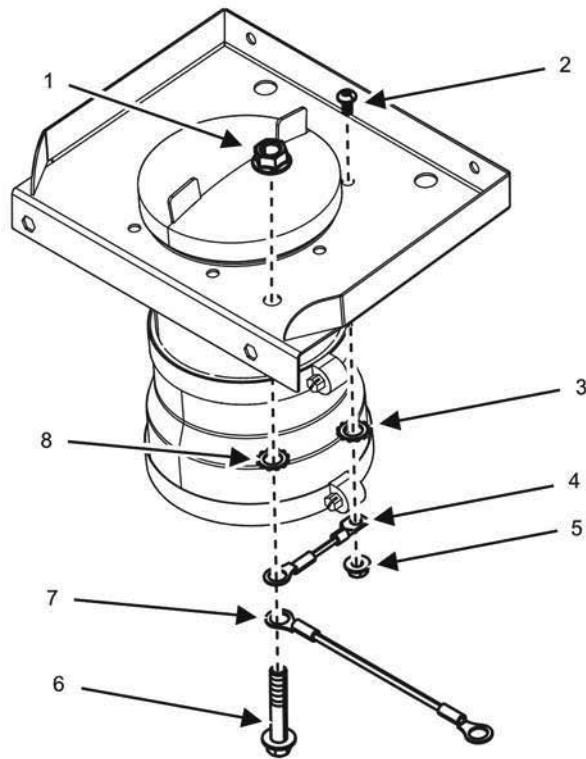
Fuel Tank Filler Neck Ground Cable — Removal.
